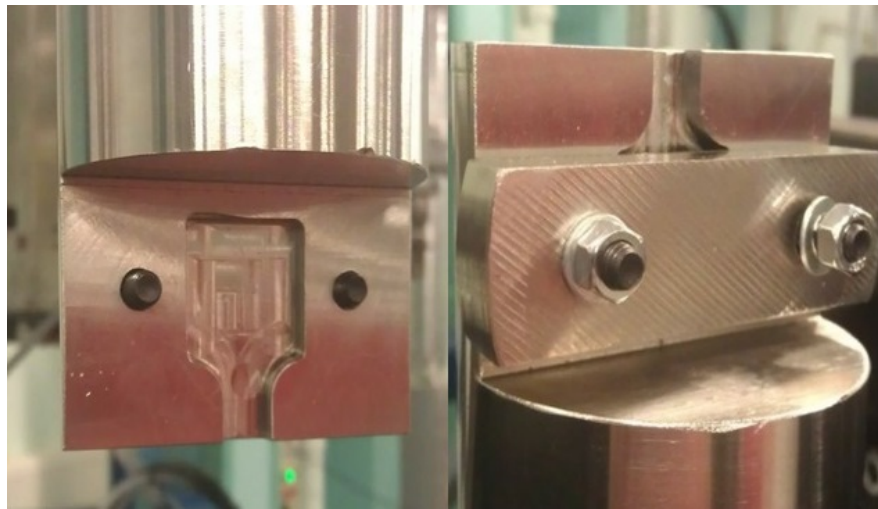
Tensile testing custom machined grips - Grips manufactured in-house for use with the Instron 8801 servo-hydraulic fatigue testing system.
